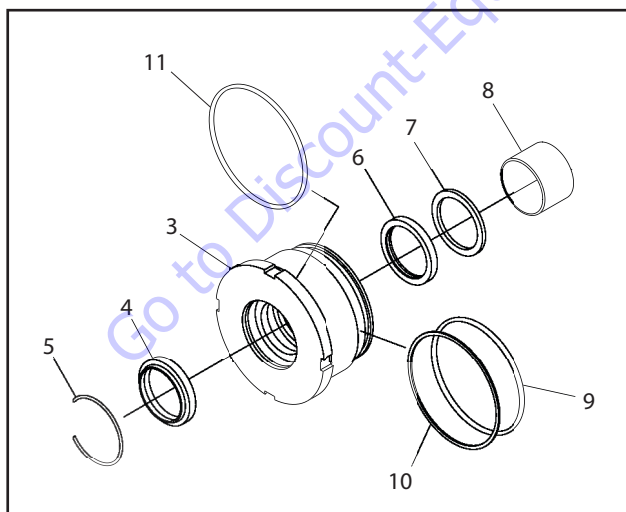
Platform Level (Slave) Cylinder - 660SJC
